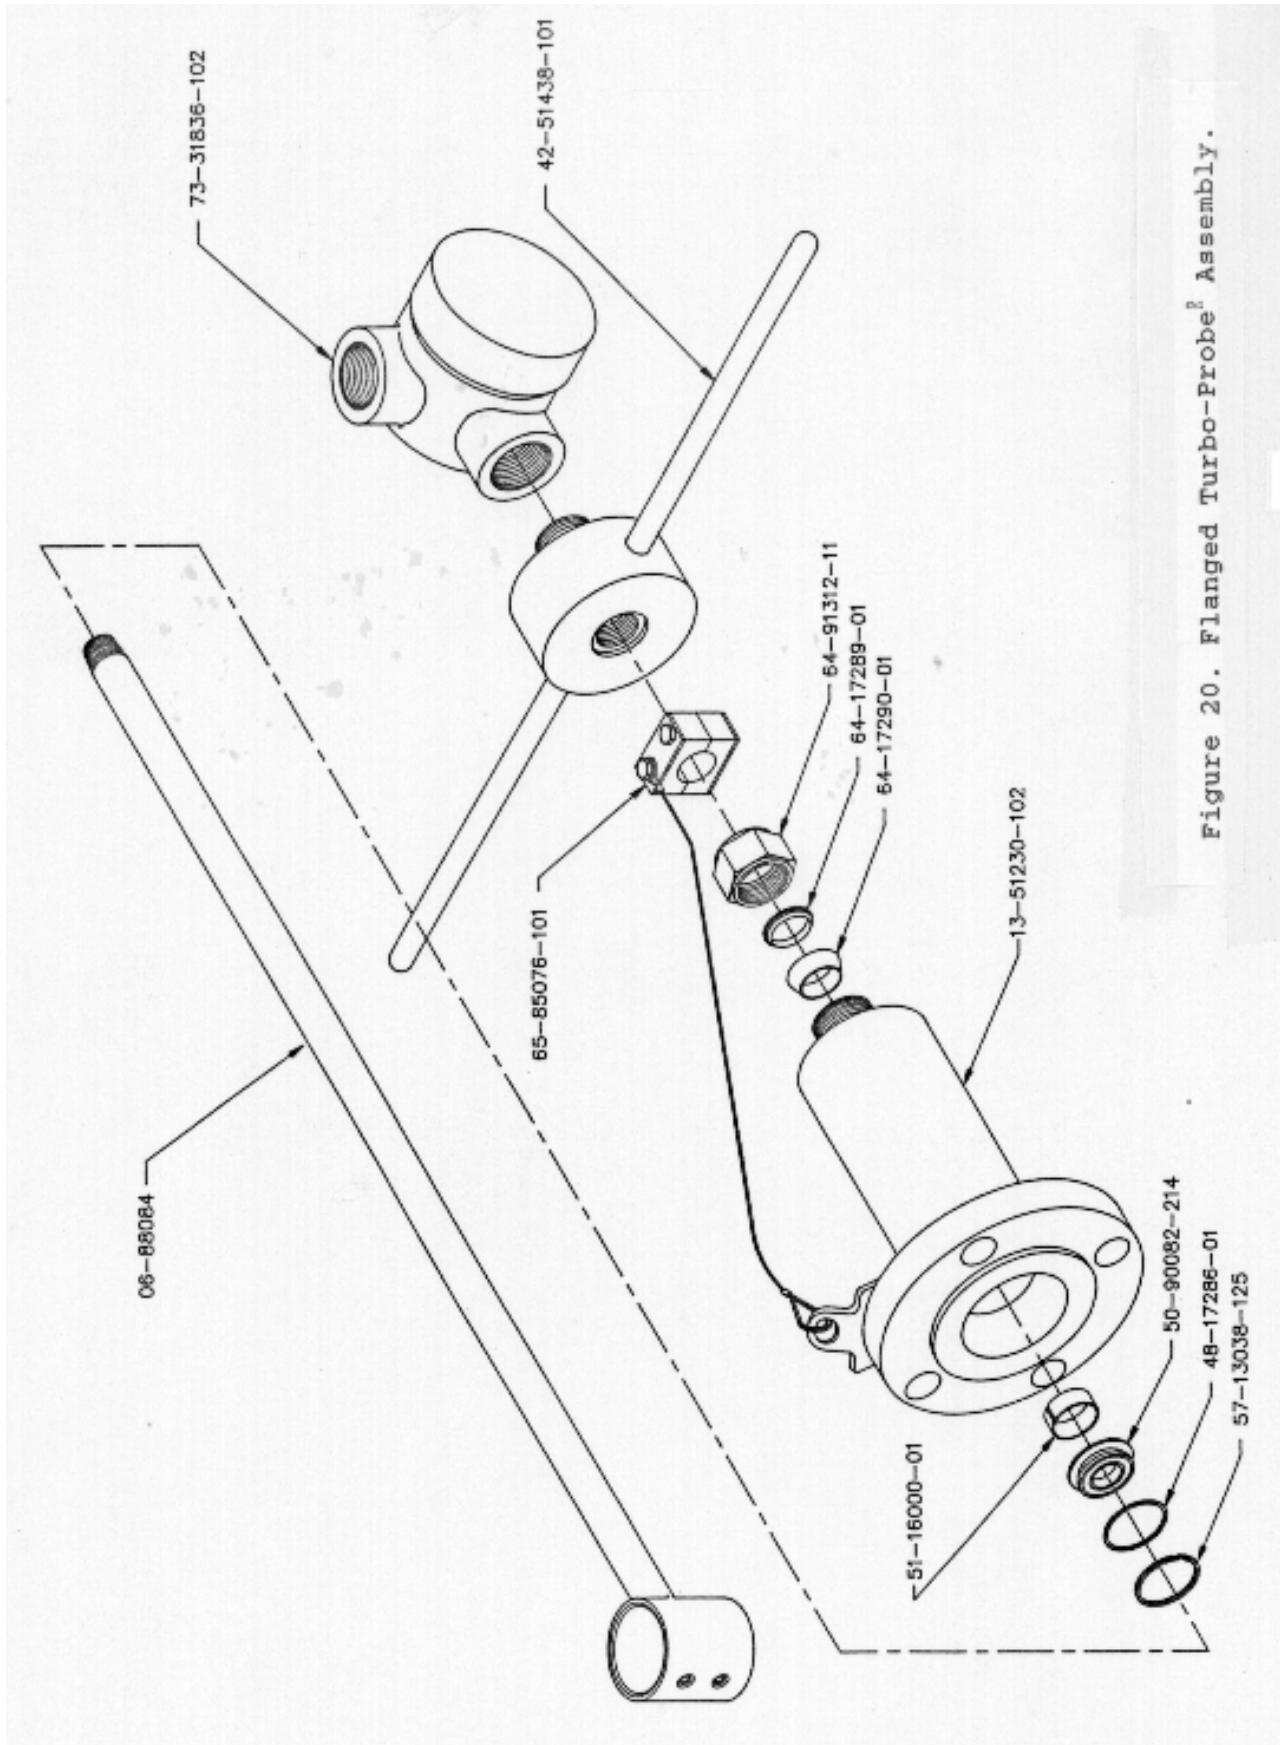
Flanged Turbo-Probe<sup>2</sup> Assembly.
